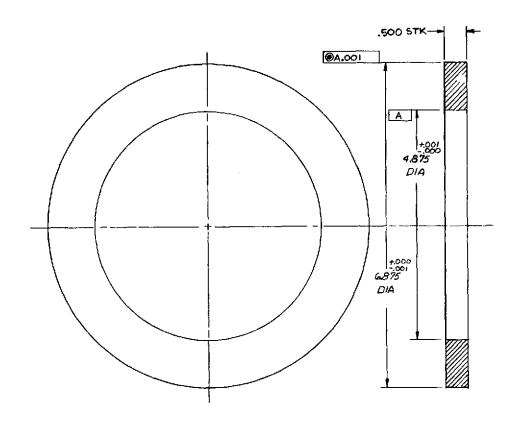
Nozzle assembly, separator -100-kW erosion loop
